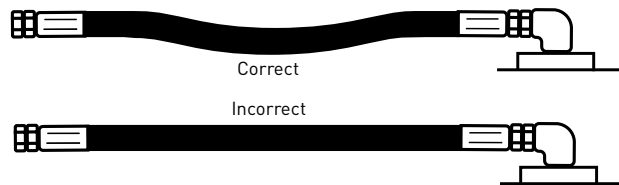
HOSE AND MACHINE TOLERANCES
